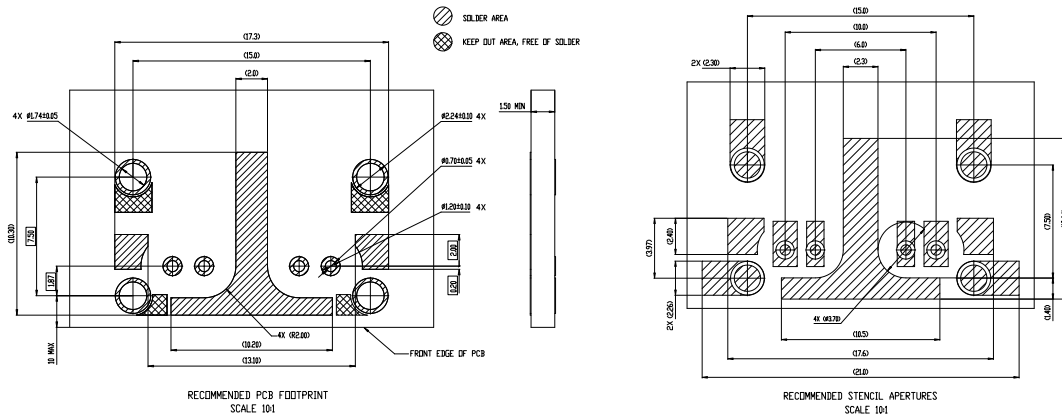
/ Pin Header 2P 90° unsealed, TE-No. 2974902
